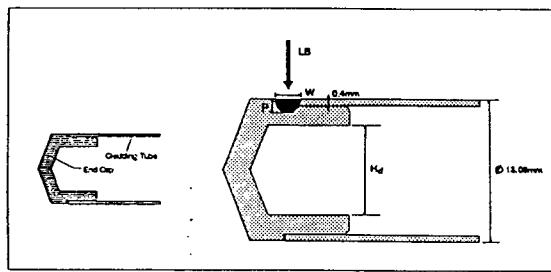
Joint geometry of experimental specimen for end cap welding
